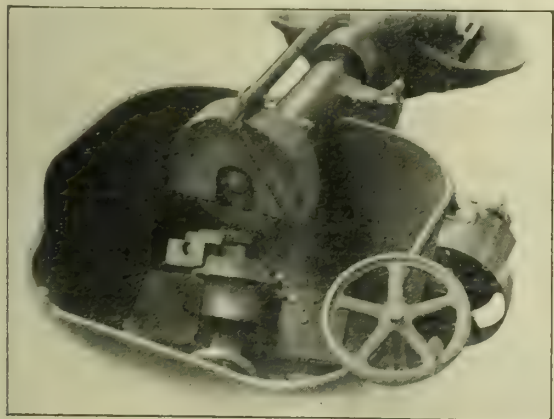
Lumsden Curved Lip Tool Grinder, No. 71 Machine.
